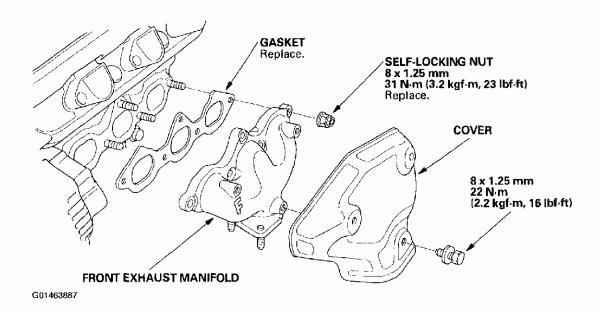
Removing Front Exhaust Manifold Courtesy of AMERICAN HONDA MOTOR CO., INC.
